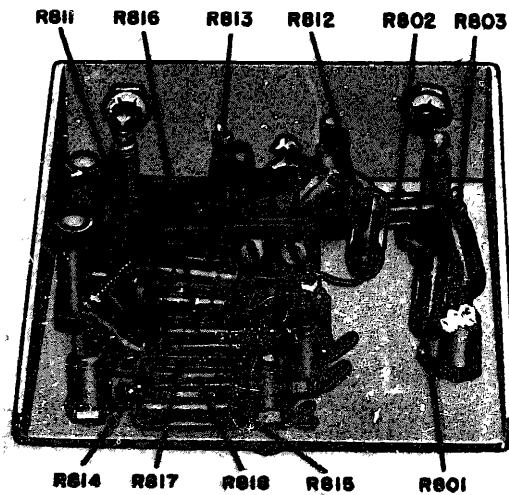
Special service bracket assembly, bottom view, circuit element location diagram.
